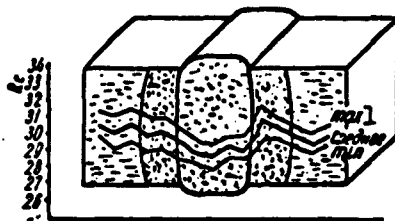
Hardness of seam welded between forged pieces by molten-slag arcless electric method; butt joint. 1) Average.
